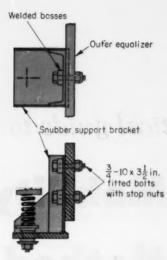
Locomotive equalizer snubber assembly. Two cold-formed body cap screws or finished hex bolts with standard thread lengths are used as fitted bolts to prevent any movement of the snubber support bracket relative to the equalizer.
